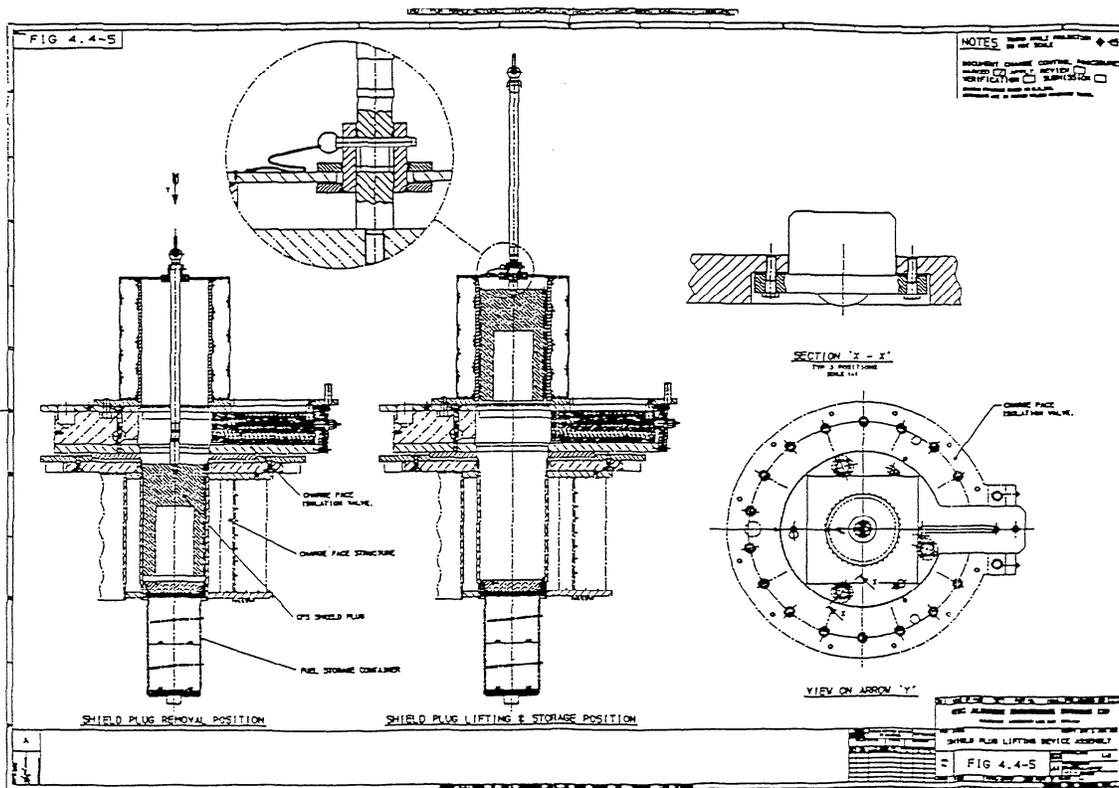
Shield Plug Lifting Device Assembly.
